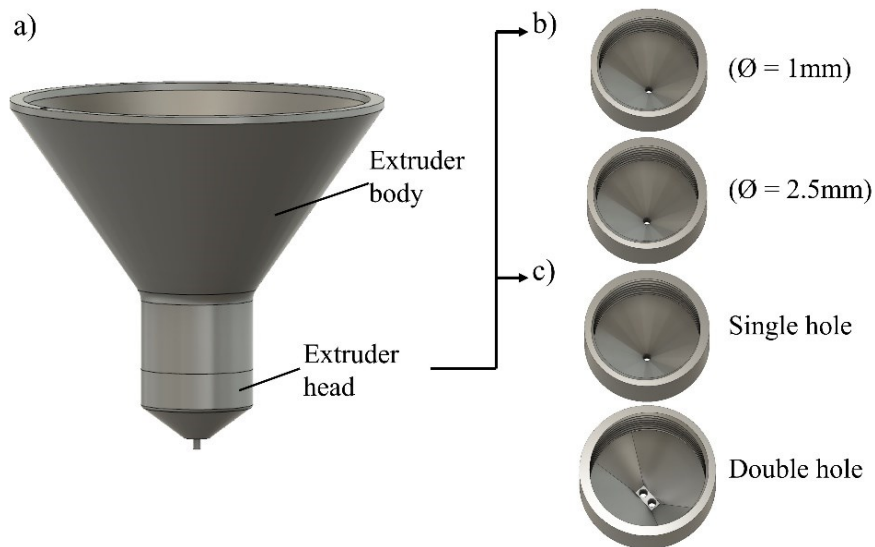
Modular extruder unit design consisting of (a) extruder body and extruder head assembly, (b) extruder head with different nozzle diameter, (c) extruder head with different nozzle opening.
